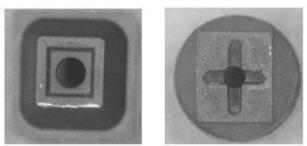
PUT with larger vacuum hole and relief type corner support design (left). Smaller vacuum design and full contact surface (right).
